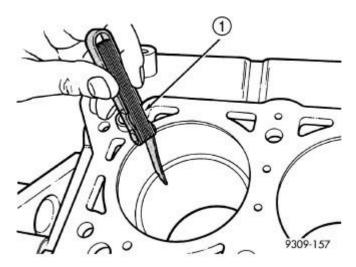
Measuring Piston Ring Gap Courtesy of CHRYSLER GROUP, LLC
